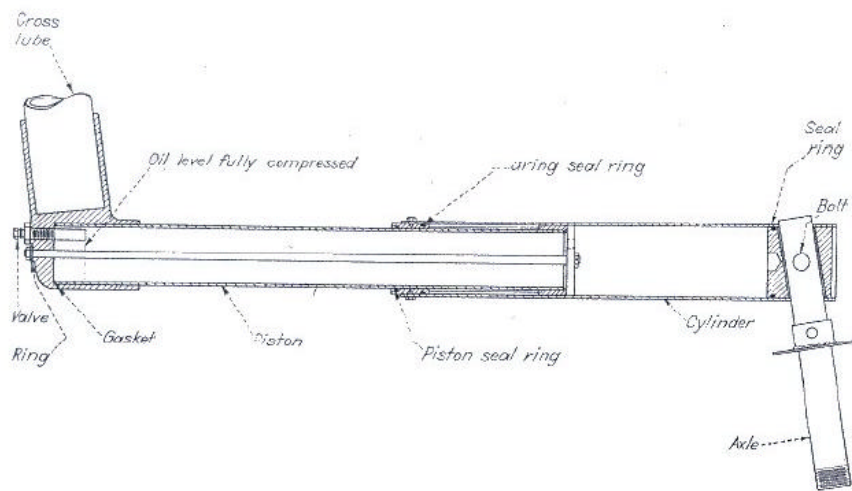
Oleo shock absorber cylinder should be inspected for external leakage, indicative of worn seal rings. Cylinder is filled in fully compressed position to point indicated by broken line at base of air valve. Air at 75 psi. is then injected after oleo is fully extended.
